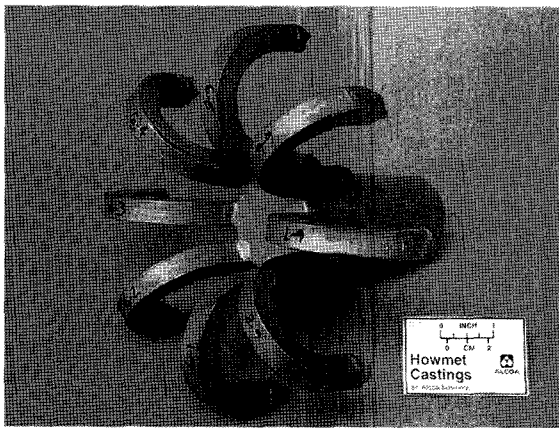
Seeded titanium casting after pouring, solidification and removal of investment material.
